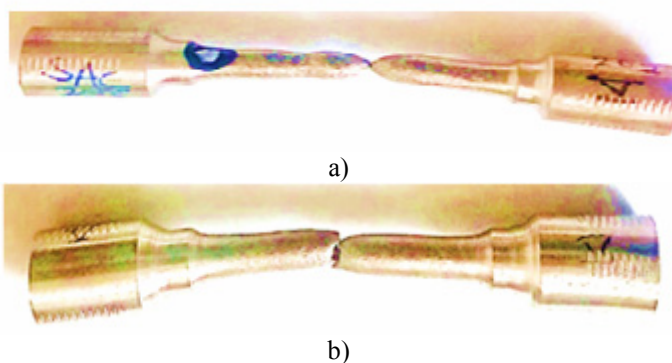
Typical ductile failure of (a) SAC305 and (b) SAC405 solder.
